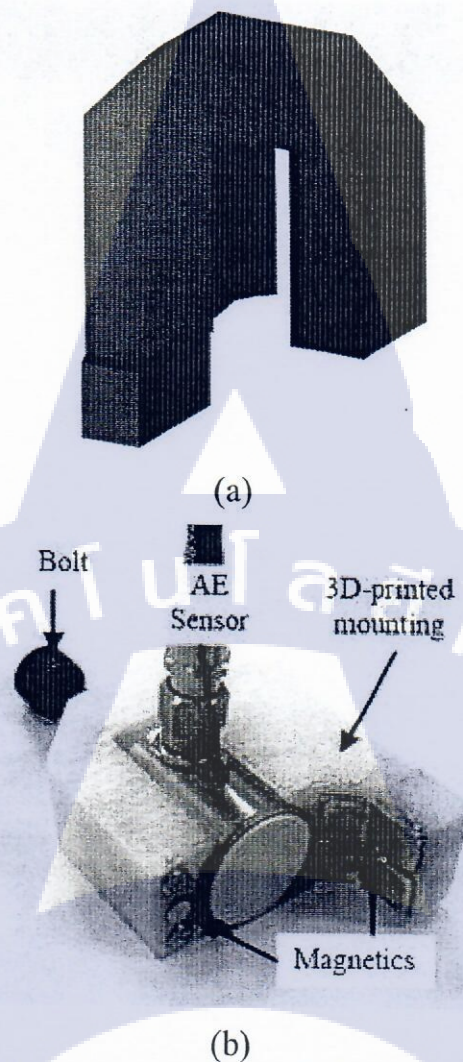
(a) CAD prototype and (b) final assembly of AE sensor and magnetic mounting
